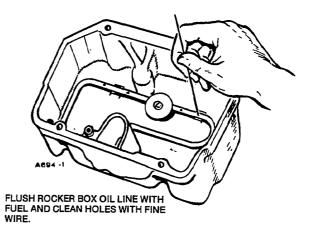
CLEANING ROCKER BOX OIL LINE
